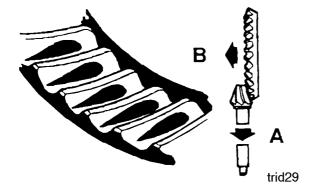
indicates that the pinion is set too deeply. This causes a noisy drive and excessive wear or damage to the gears.
